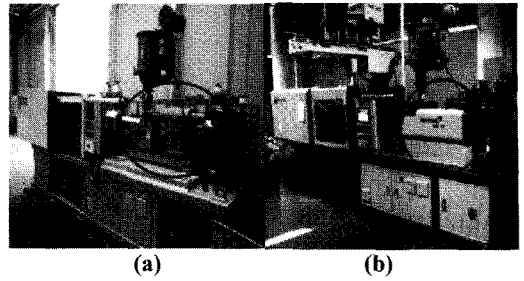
The high speed injection molding machine (a) before and (b) after improving the injection unit
